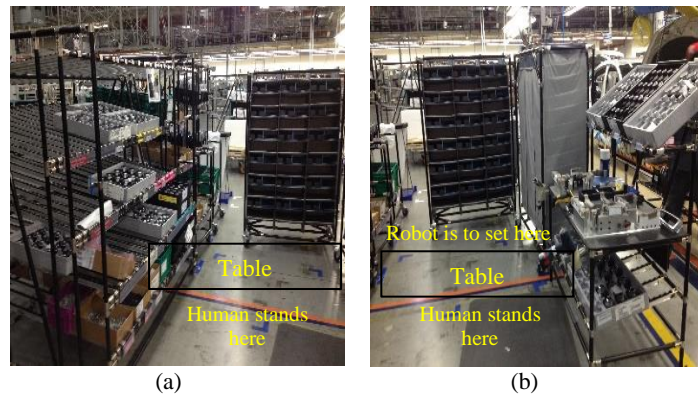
(a) The current practices of center console assembly. The parts are stored at different shelves in the assembly area so that the human worker can collect the parts to assemble on a table, (b) the proposed assembly through HRC where a human worker and a robot collaborate in the assembly area based on an optimum subtask allocation scheme to perform the assembly tasks [courtesy: BMW Manufacturing Co., Spartanburg, SC, USA].
